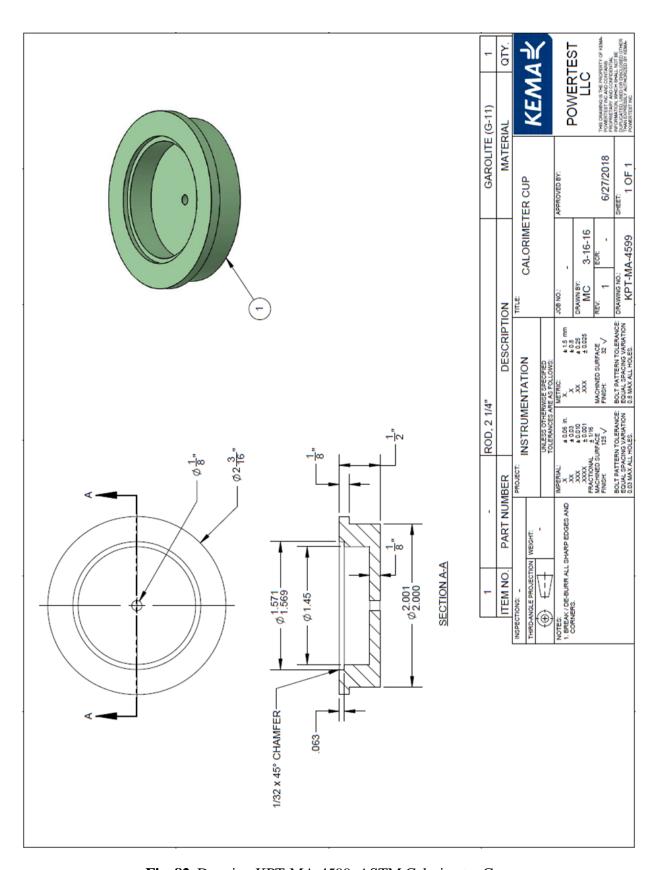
Drawing KPT-MA-4599, ASTM Calorimeter Cup.
